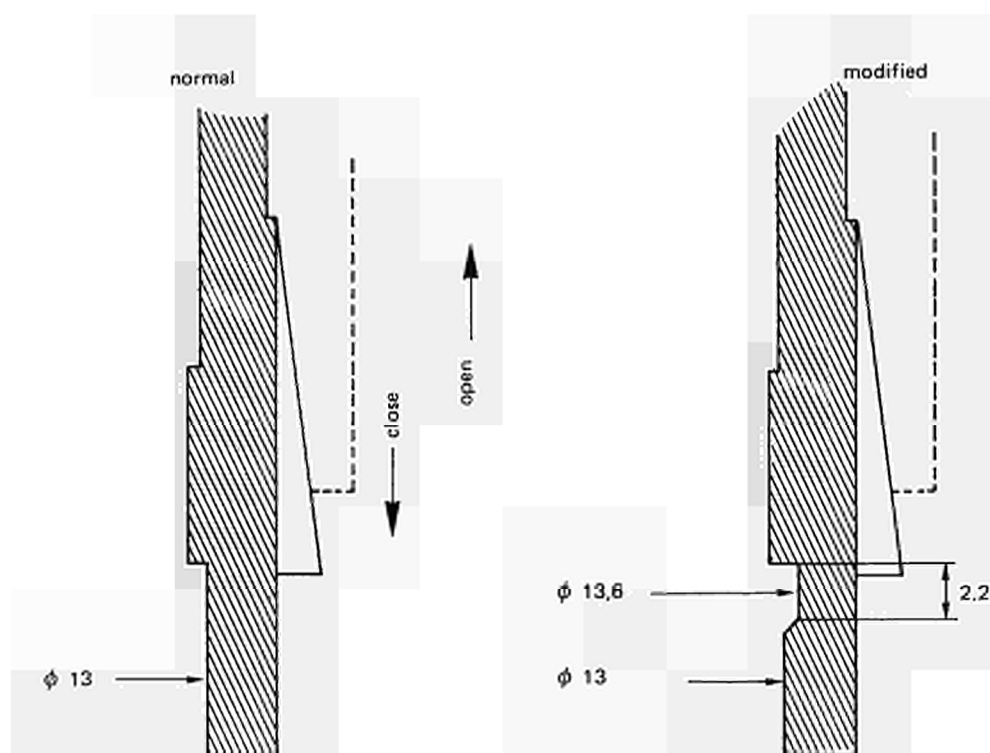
Sketch showing the modification of the handling tool in Kahl, to make it capable of putting in and pulling out the bushings
